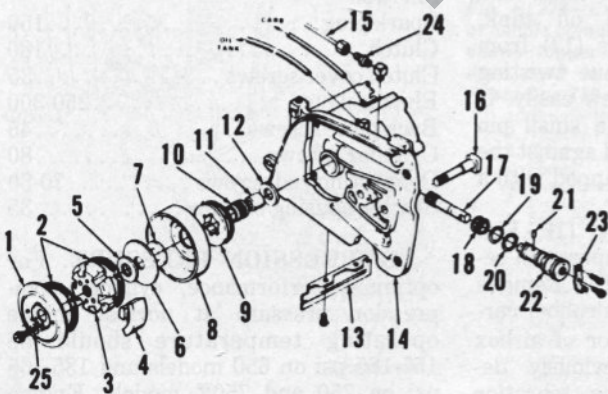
Exploded view of clutch and oil pump assemblies.
